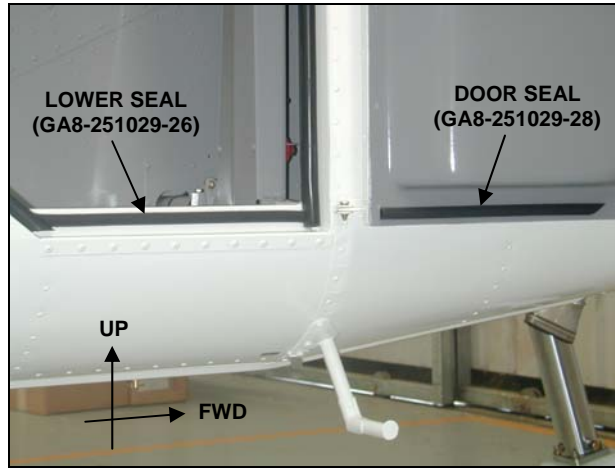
New seals installed in the lower door opening and on the inside of the door (right hand side shown). Note the alignment of the seal on the door with the seal along the outboard face of the sill in the door opening.
